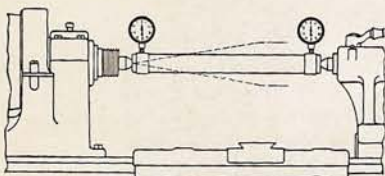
Testing the Height of the Headstock Spindle and Tailstock Spindle with Dial Indicator
